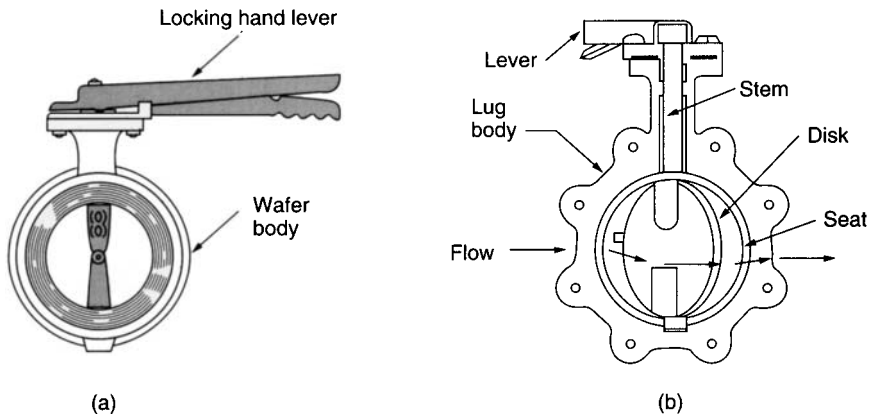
Butterfly valves. (a) Wafer body; (b) lug body.
